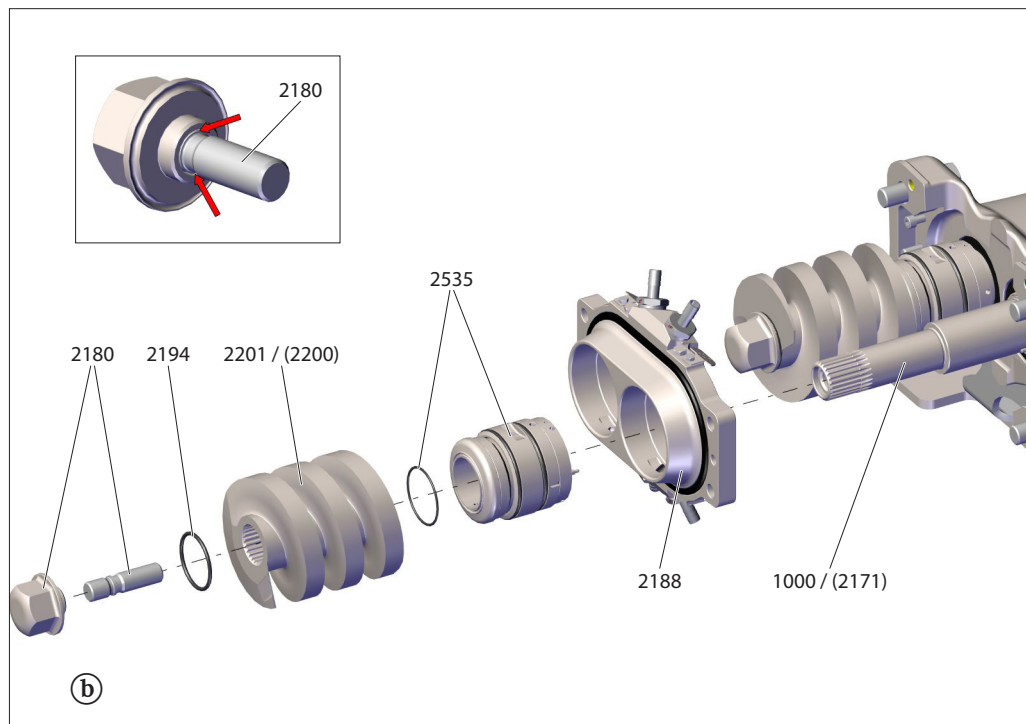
Cleaning special components: Spindle screw, screw spindle, mechanical seal cartridge, seal retainer and input or output spindles
